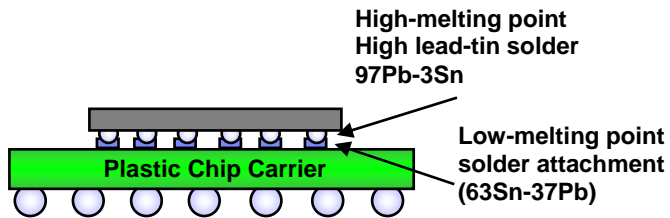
Attachment of a flip chip with high-melting point solder bumps (97Pb-3Sn) to a Plastic Chip Carrier with a low-melting point solder (63Sn-37Pb).
